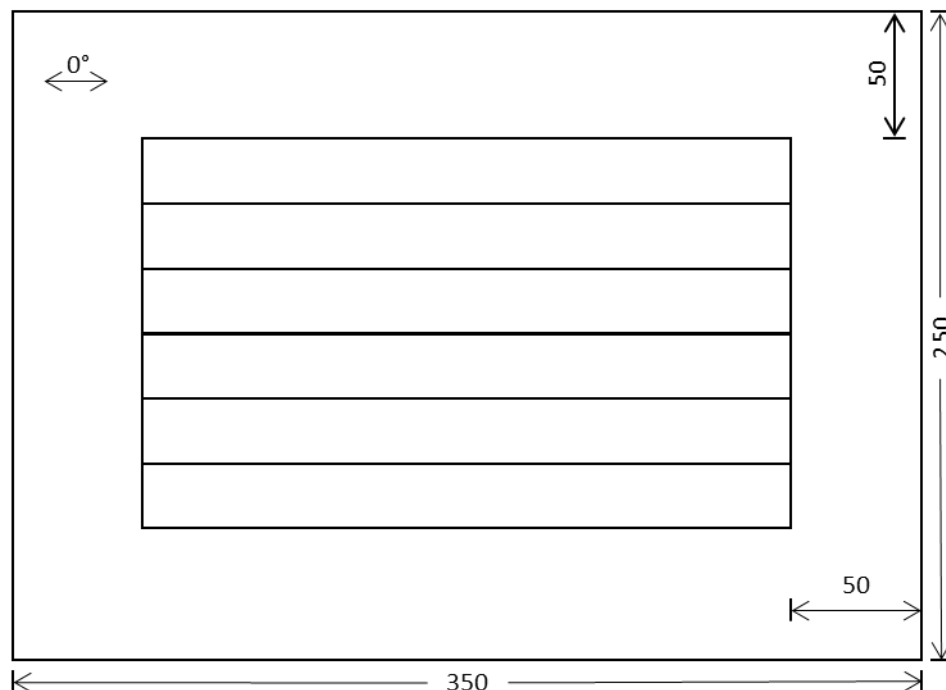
Positioning of the coupons on the test panels for GIC test. All dimensions are expressed in mm.
